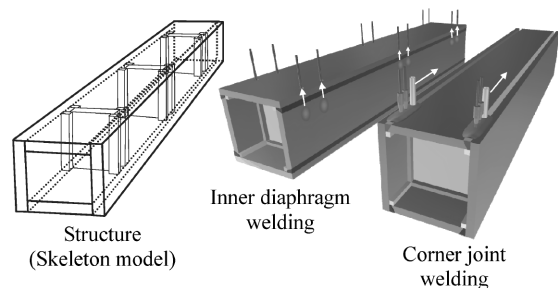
Structure and assembly welding methods of built-up box section column
